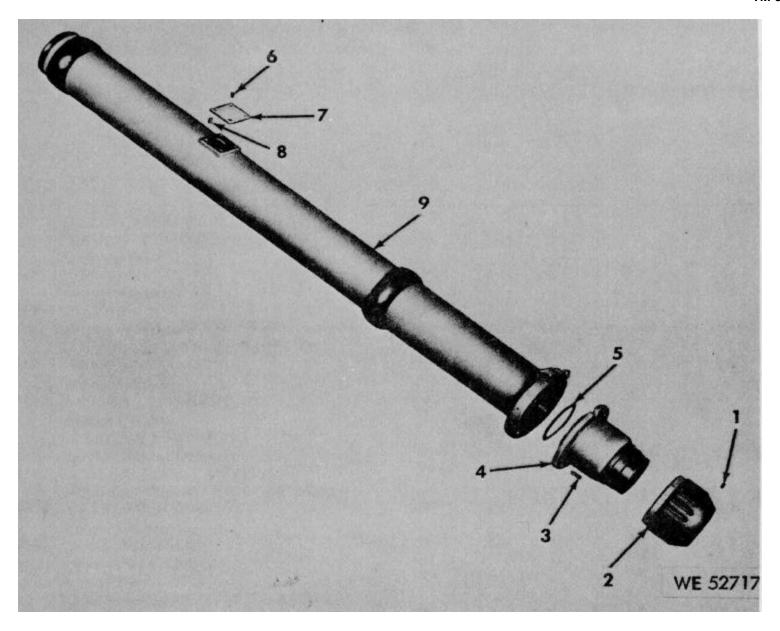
Telescope M97, M97G, and M97H-partial exploded view.
